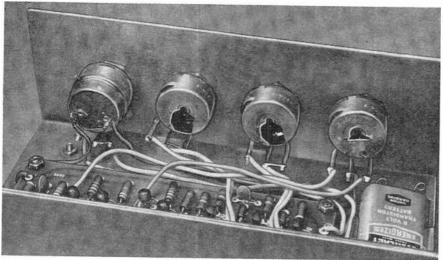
All controls, except pots R28 and R29, are mounted on front panel. Battery holder and printed circuit board are mounted inside the chassis; use rubber feet on under side.
